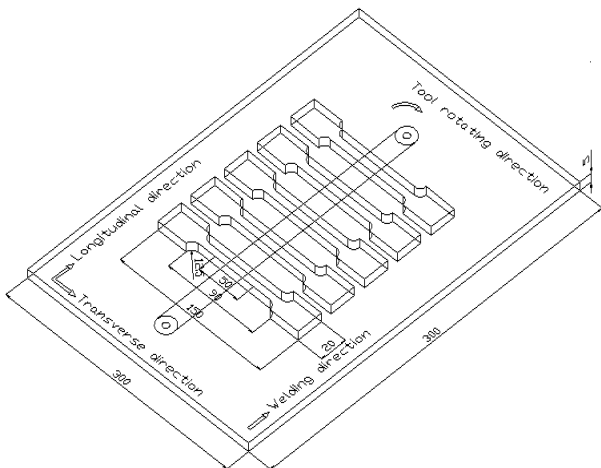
Dimensions of Butt Joint Configurations in (‘mm’)
